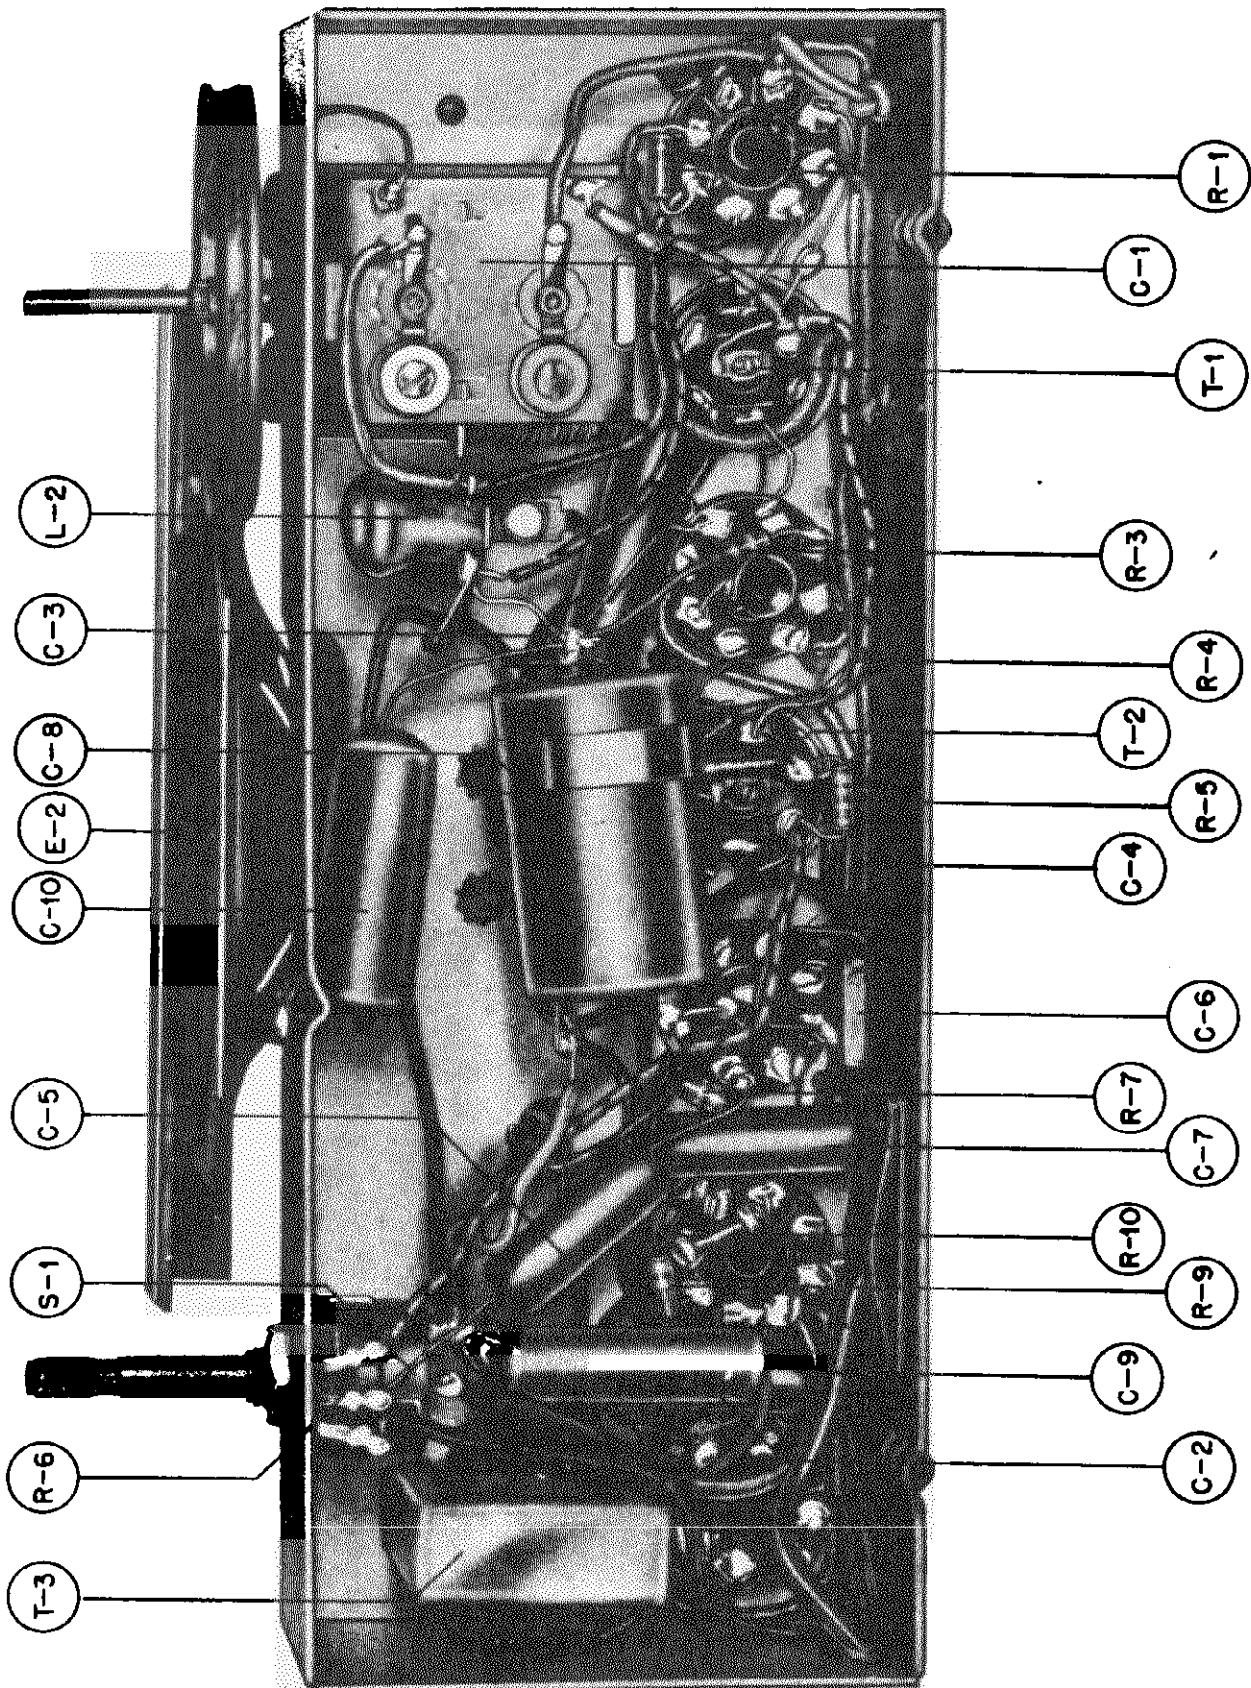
BOTTOM VIEW (CHASSIS HS.1)
